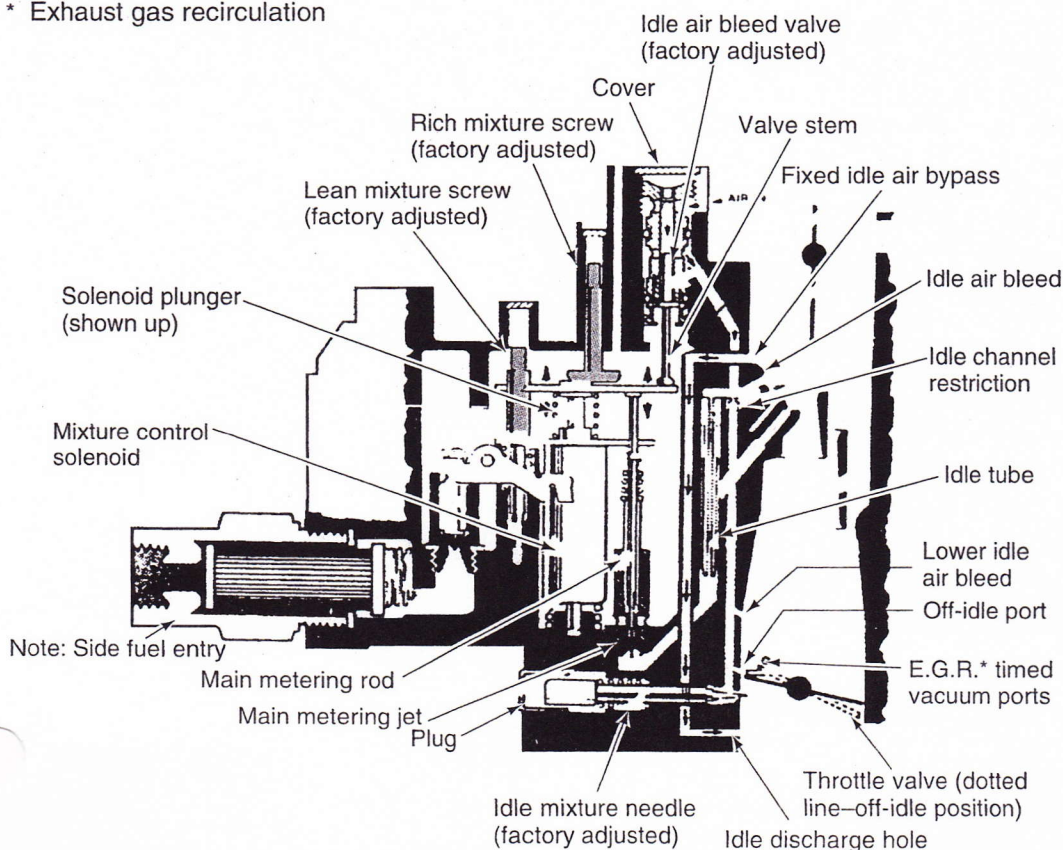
Typical late-model carburetor. Courtesy of Chevrolet Motor Division, General Motors Corporation
